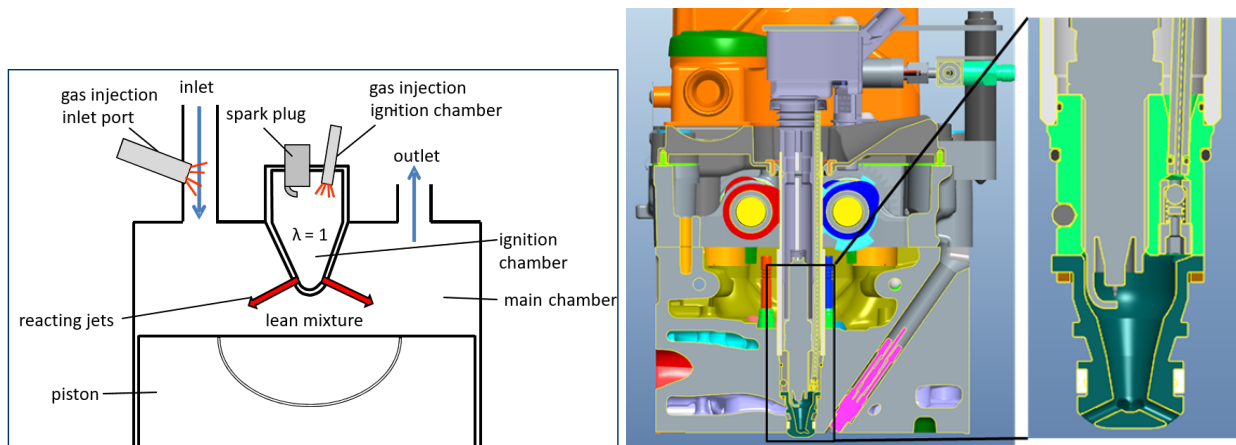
Scheme of ignition chamber for ultra-lean CNG combustion(left), package of the ignition chamber into the cylinder head of a VW 2.0L TDI® engine(right)
